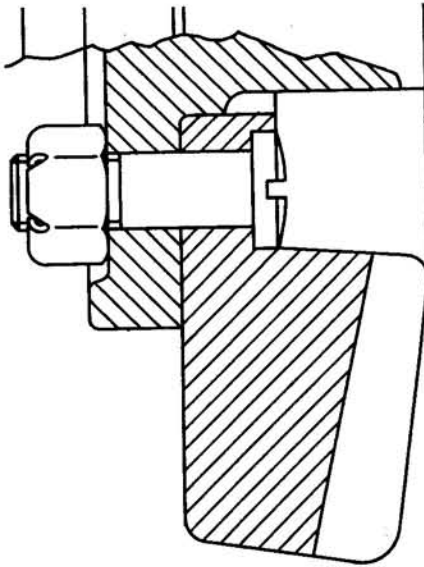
A — Cross-sectional view of differential case and ring gear showing proper installation of slotted head bolts and self-locking nuts when renewing ring gear.
